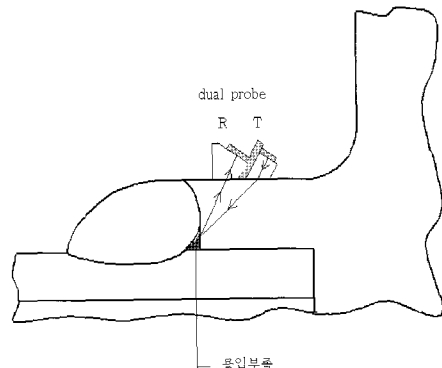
Testing principle and structure of ultrasonic transducer for socket weldment inspection
